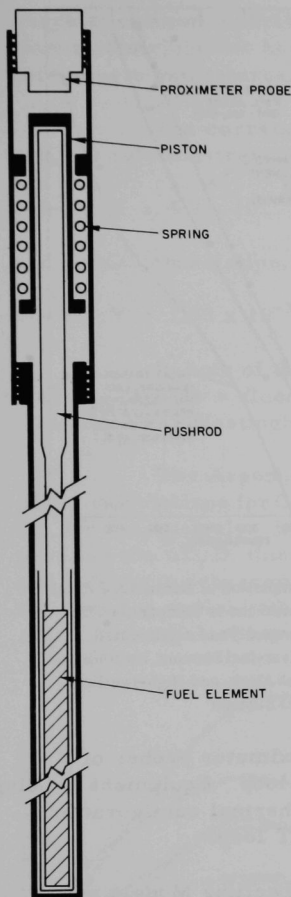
Fixture Used for Detecting Axial Fuel Motion
